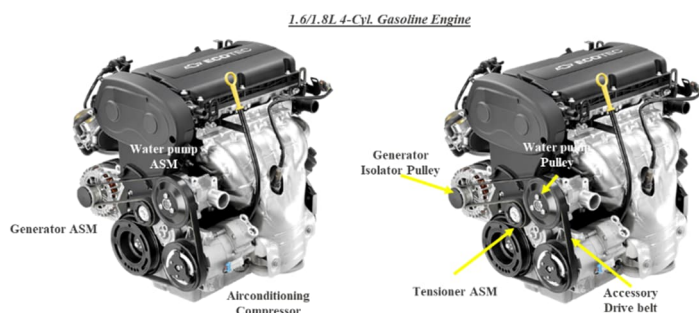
Engine – Accessory Drive System with Auxiliary components
